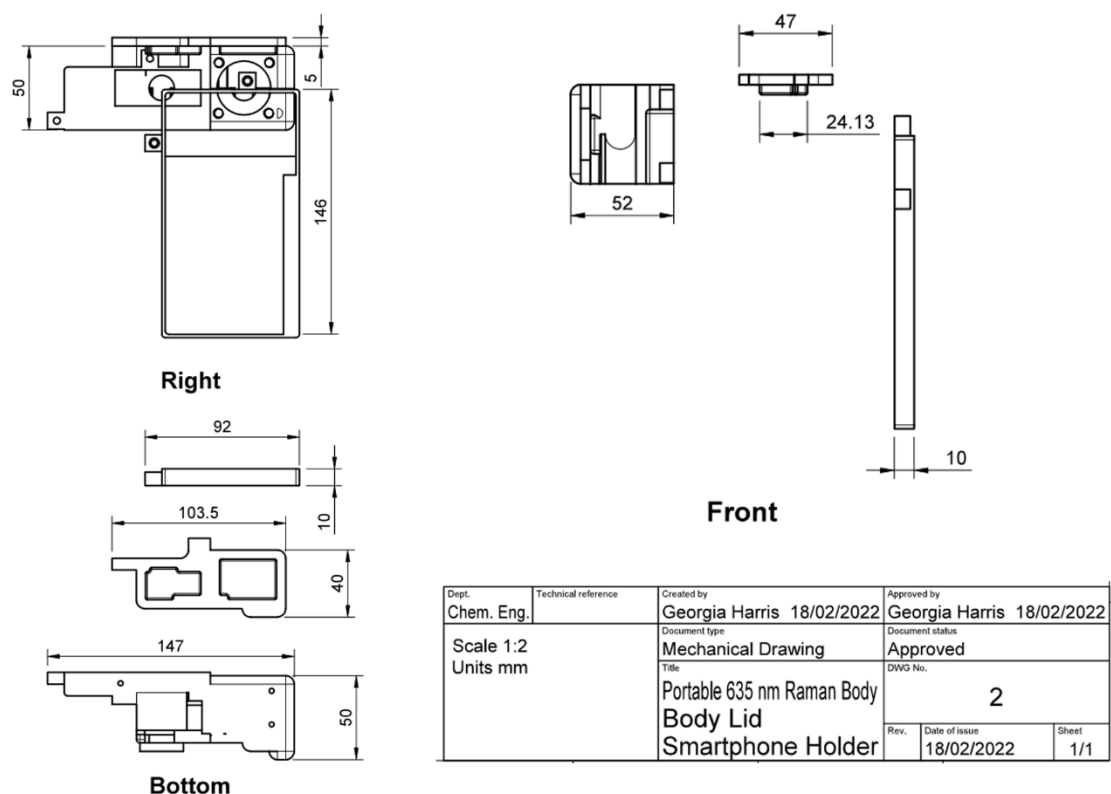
Mechanical drawing of the Right, Bottom and Front view of the full EyeD device with the dimensions labelled, the lid to prevent stray light exiting or entering and the mount to attach the smartphone with the D-Eye fundus module are featured.
